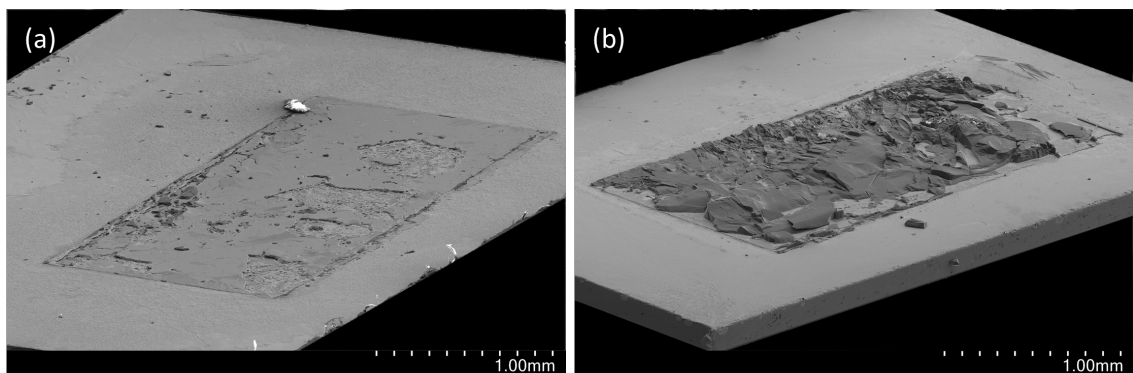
Two different failure modes of two identical samples (test structure VI) caused by the alignment of the shear tool during shear testing. (a) Aligned (tool and sample contact surfaces are parallel) shows a mainly adhesive fracture mode while the misaligned (tool and sample contact surfaces are not parallel) sample (b) shows a cohesive fracture in the die.
